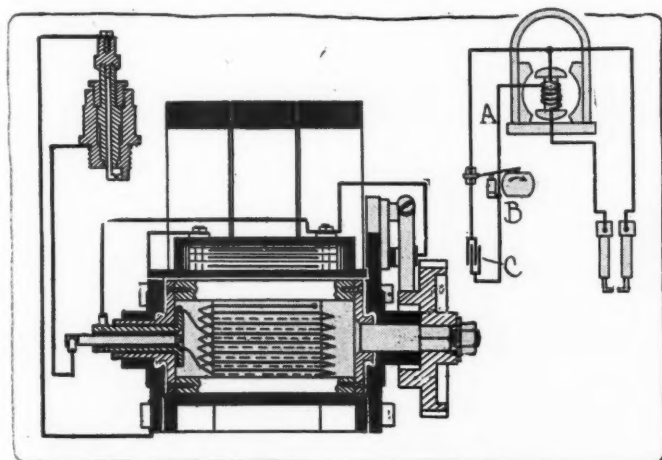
Sectional view of the magneto patented by Honold designed to give a prolonged high-tension spark between the plug points with a high-tension magneto. This is produced by the shunt coil A working through the interrupter B and condenser C
